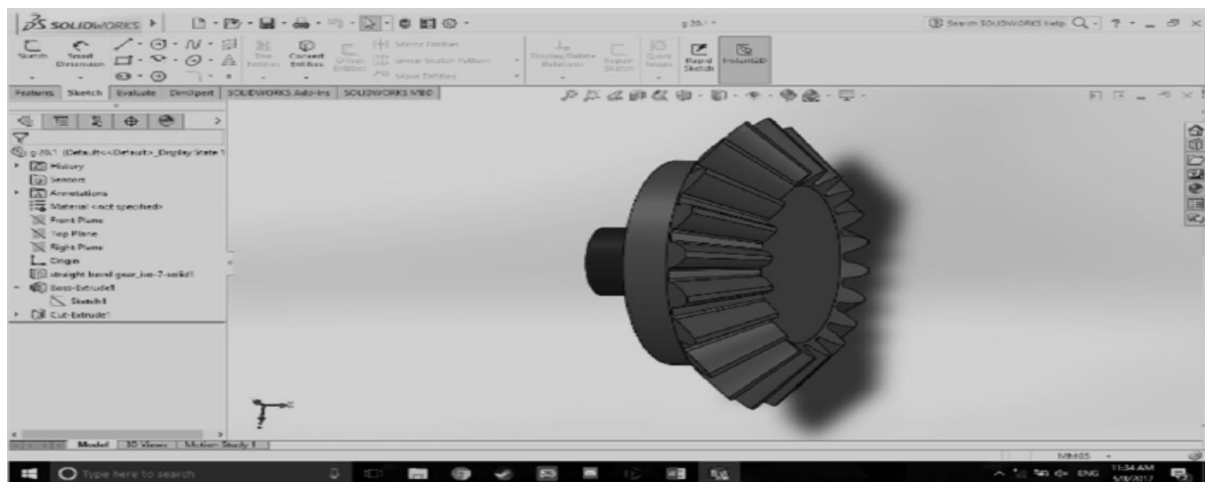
This figure represents the modeling of first side gear in solidworks. It is created by drawing the bevel gear profile from prerequisites and removing the faces of bevel gear tooth for 45 deg mating of other gears for assembly and adding an extruded stub axles rods to it.
